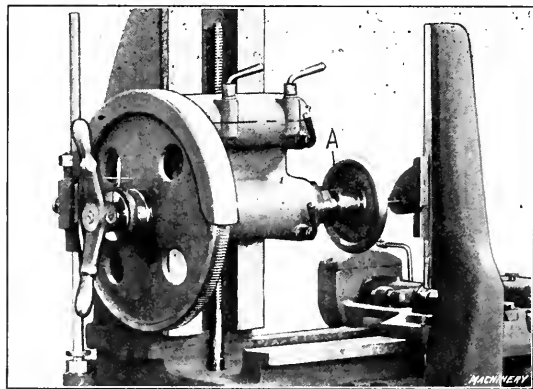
Finish-boring Outer Supporting Arm in Alignment with Spindle
